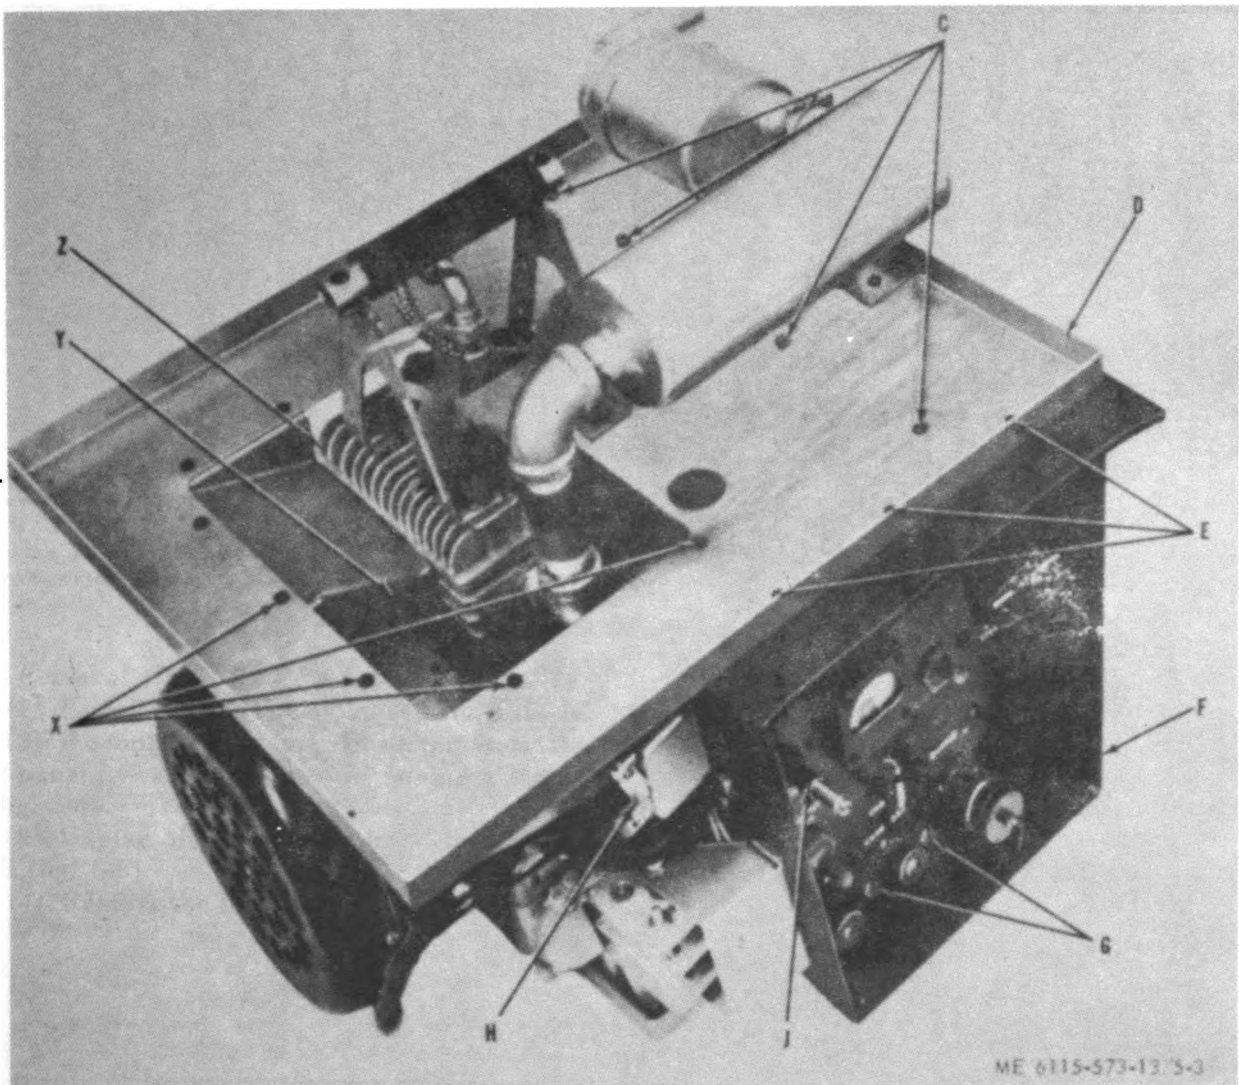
Control panel and side panel, removal and installation (PU-422B / U).
